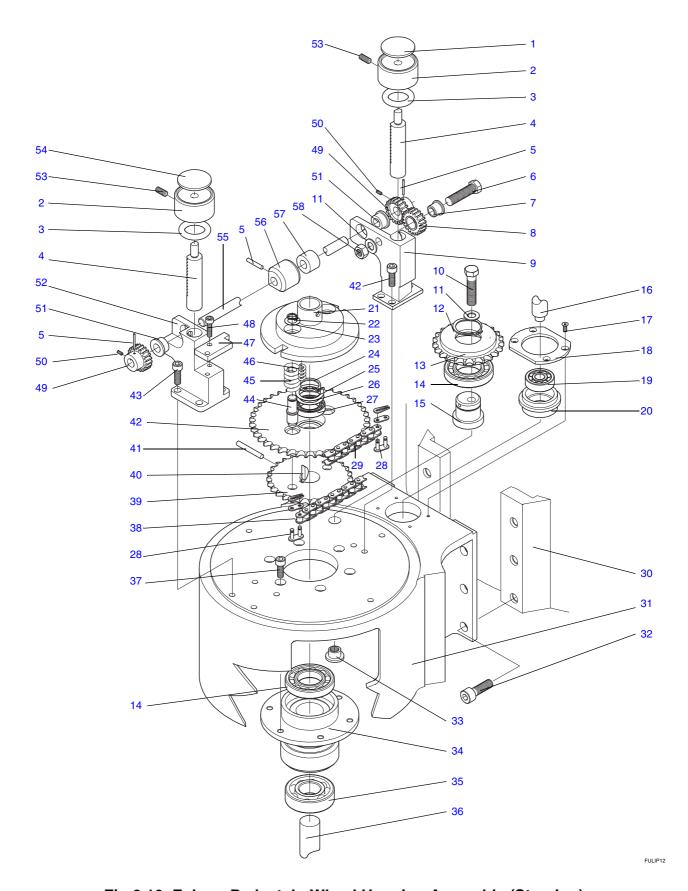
Fulmar Pedestal - Wheel Housing Assembly (Steering)
